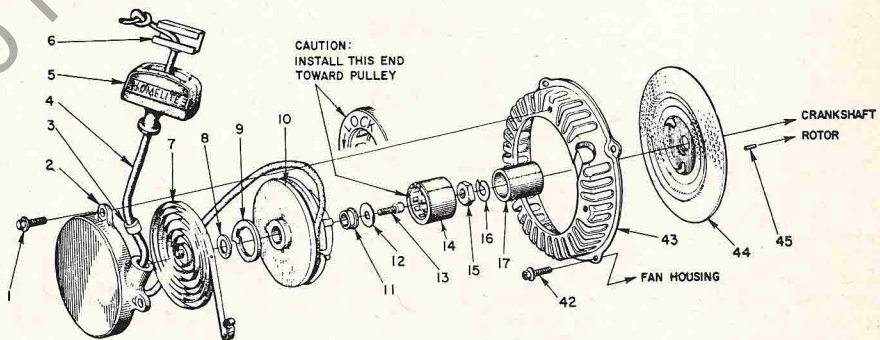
Exploded view of over-running clutch type starter used on models 995-D and 995-G. Refer to Fig. HL25A for exploded view of ball type starter used on earlier models of this series.
